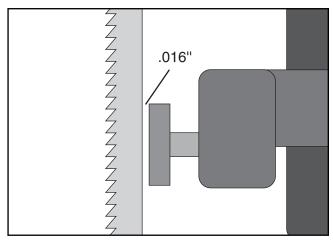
Blade should be aligned approximately .016" away from the bearing edge.
